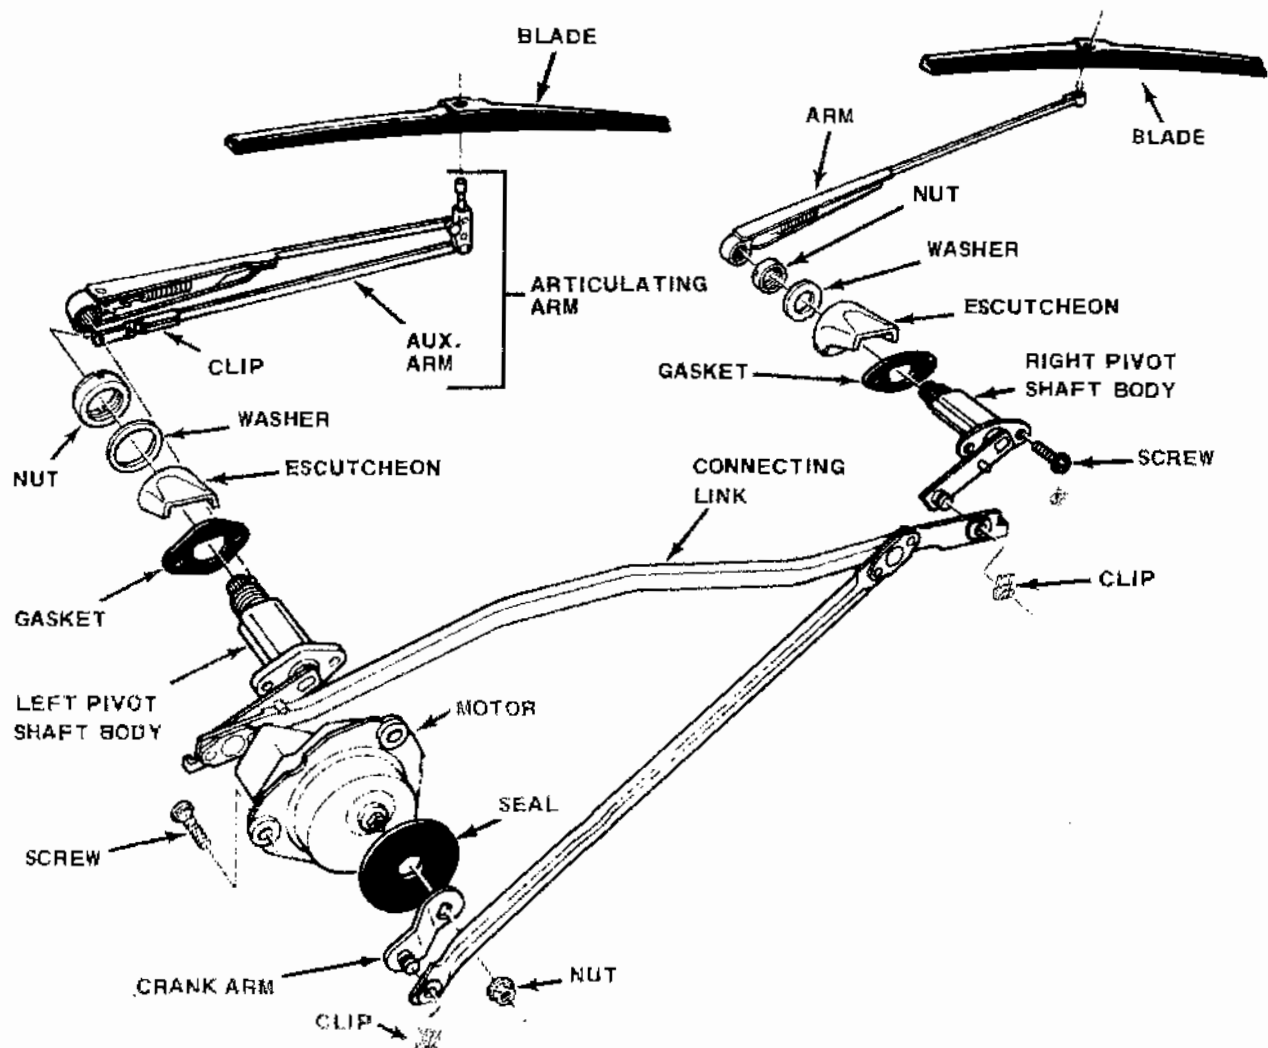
Windshield Wiper Components - Cherokee-Wagoneer-Truck
